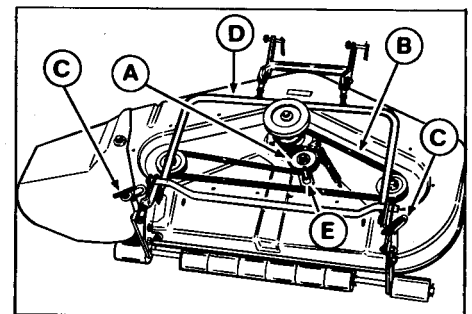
Mower Drive Belt - 42 Inch Mower Shown
